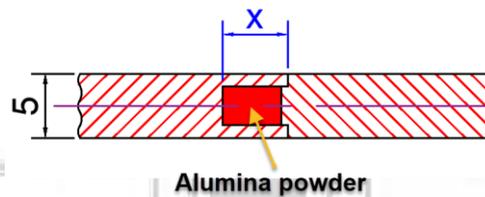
Assembly of the Two Parts of the Welding Specimen
